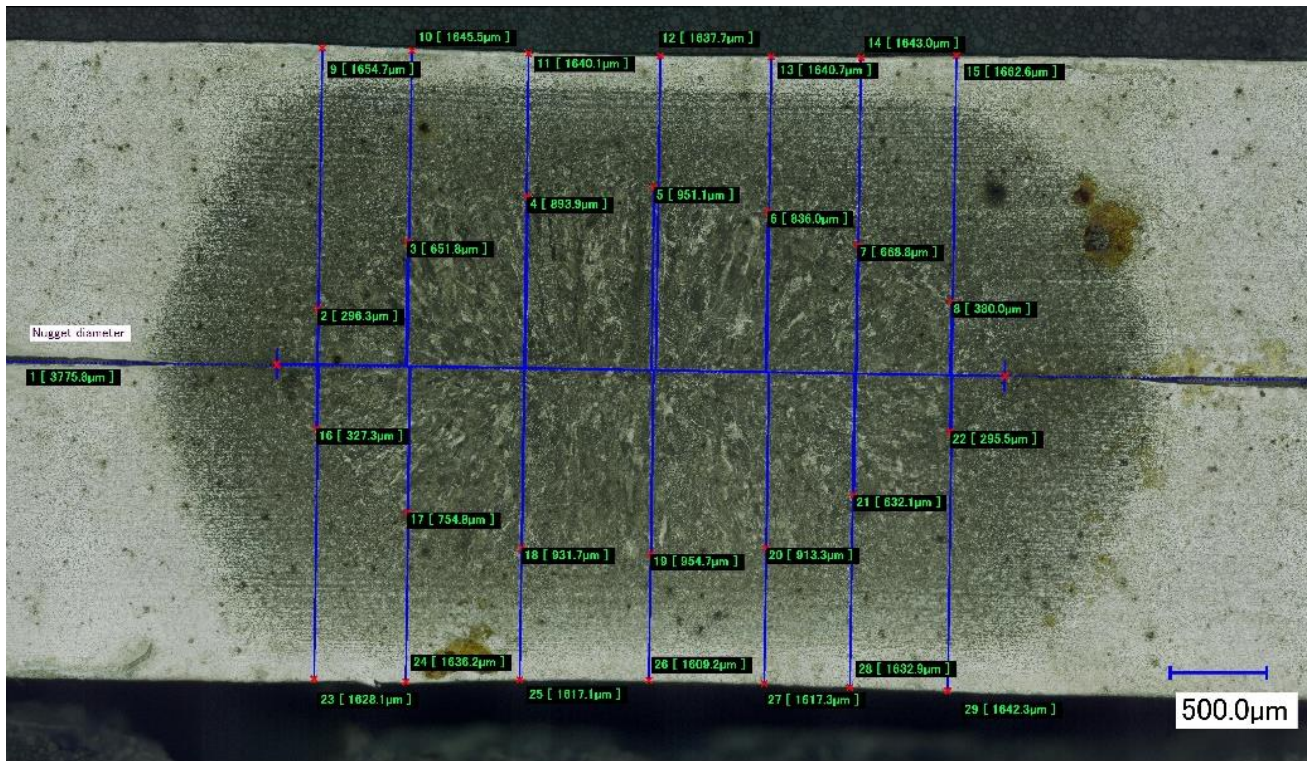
Cross section of an off centered spherical weld. The penetration depth can be seen throughout various parts of the weld.
